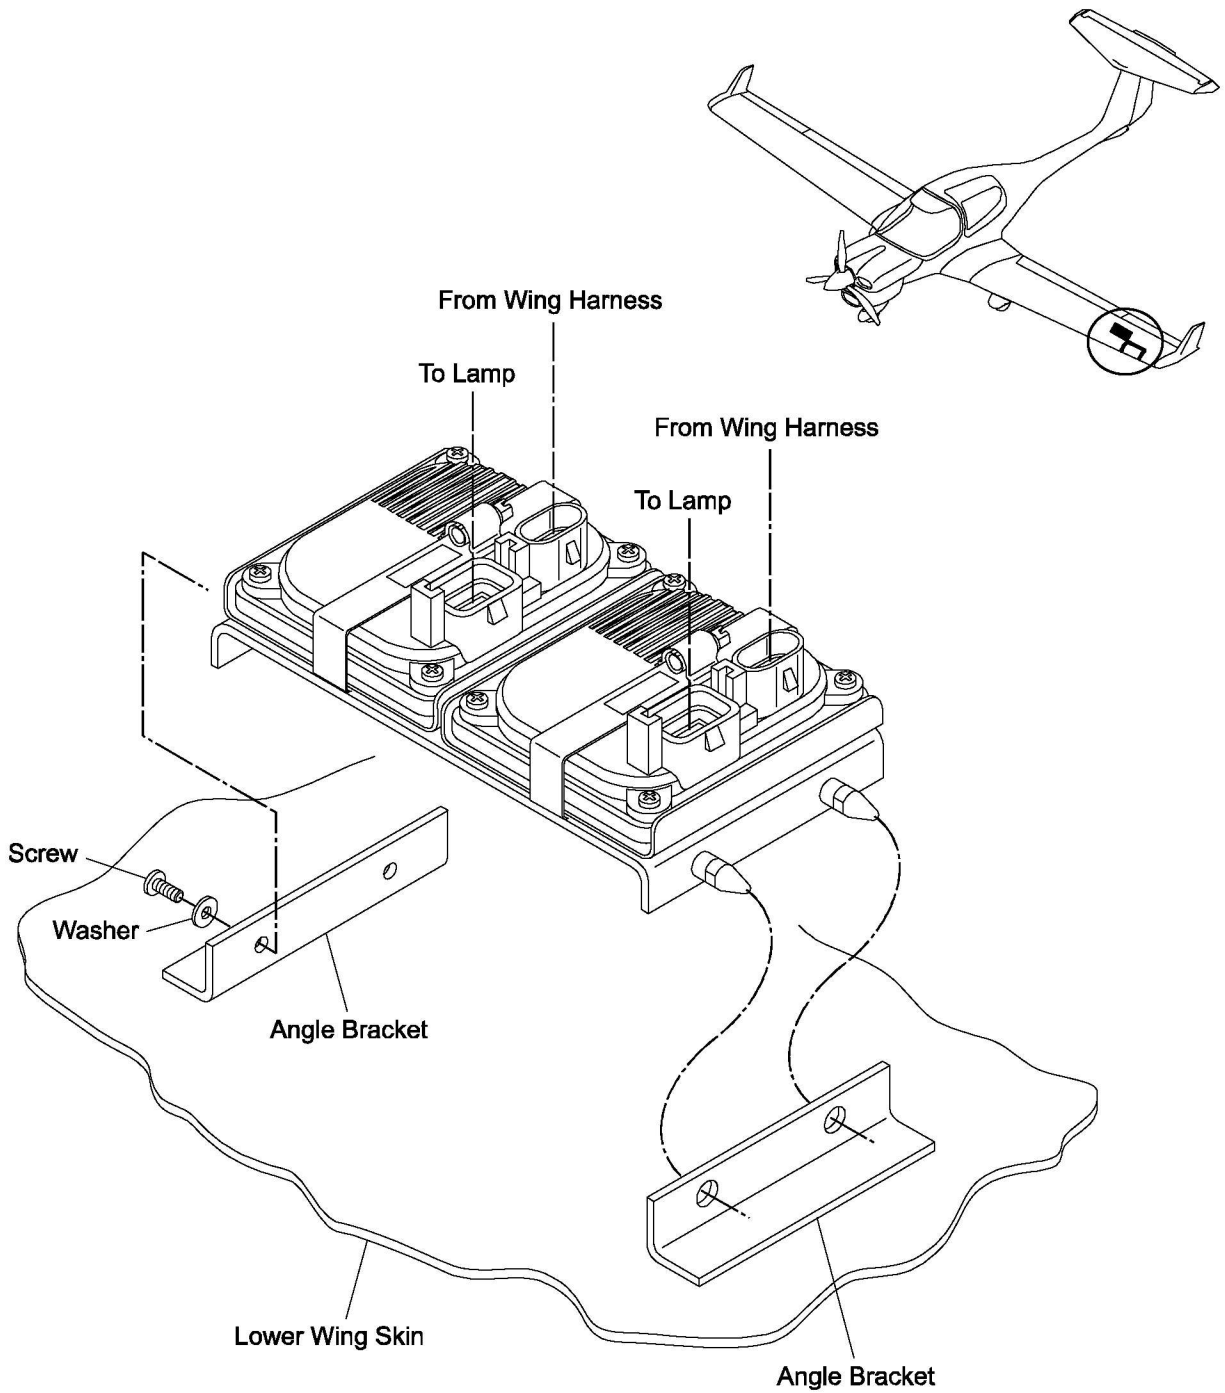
Ballast Assembly (HID Lamps, if OÄM 40-258 is installed)
